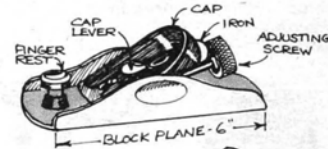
UNLIKE BENCH PLANES, THE IRON IS MOUNTED WITH BEVEL FACING UP.
